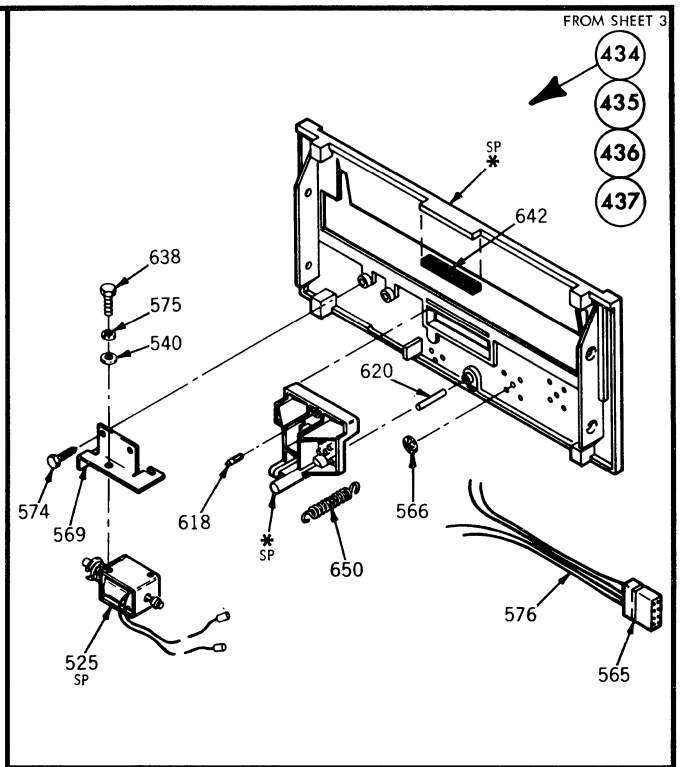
DRIVE MOTOR AND LIFTER ASSEMBLIES
